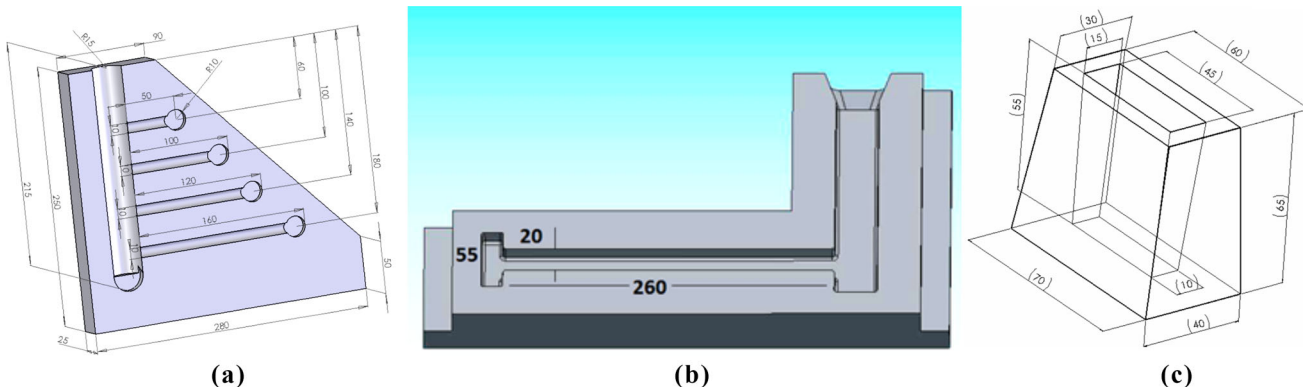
Dimensions of the molds used in the study. (a) CRC, (b) T, (c) RPT mold.
